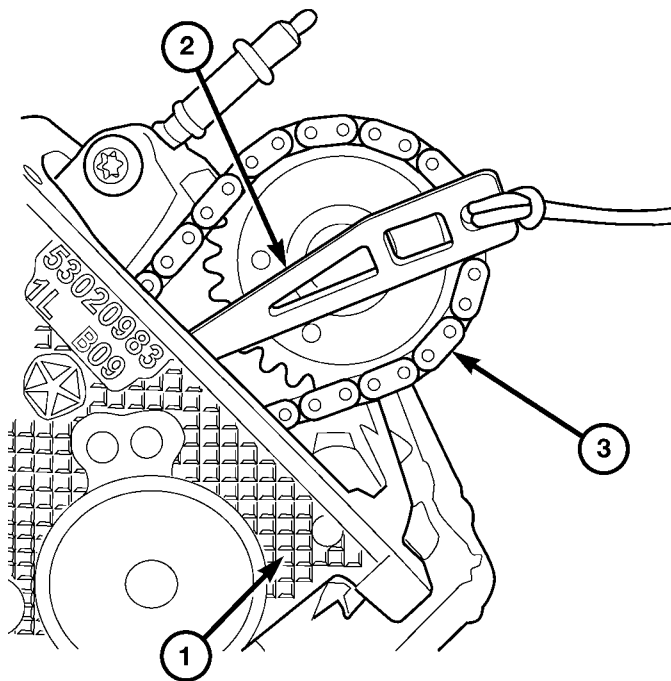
SECURING TIMING CHAIN TENSIONER USING TIMING CHAIN WEDGE
